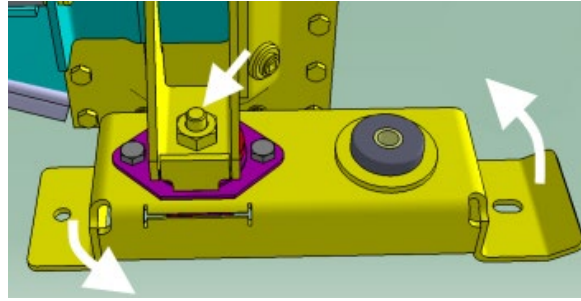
MOUNTING SUPPORT IN INITIAL POSITION
